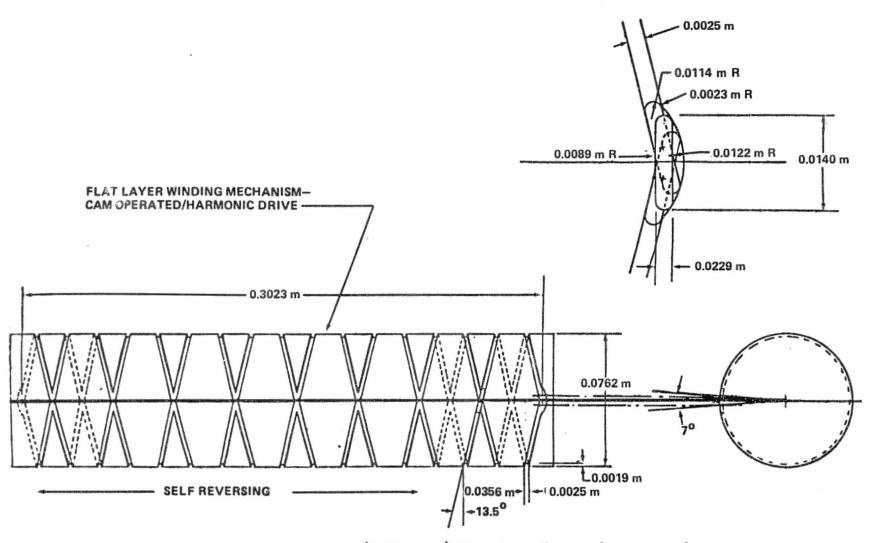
0.366 mm (0.0144 in.) diameter tether — alternate reel mechanism — cam lead screw.
